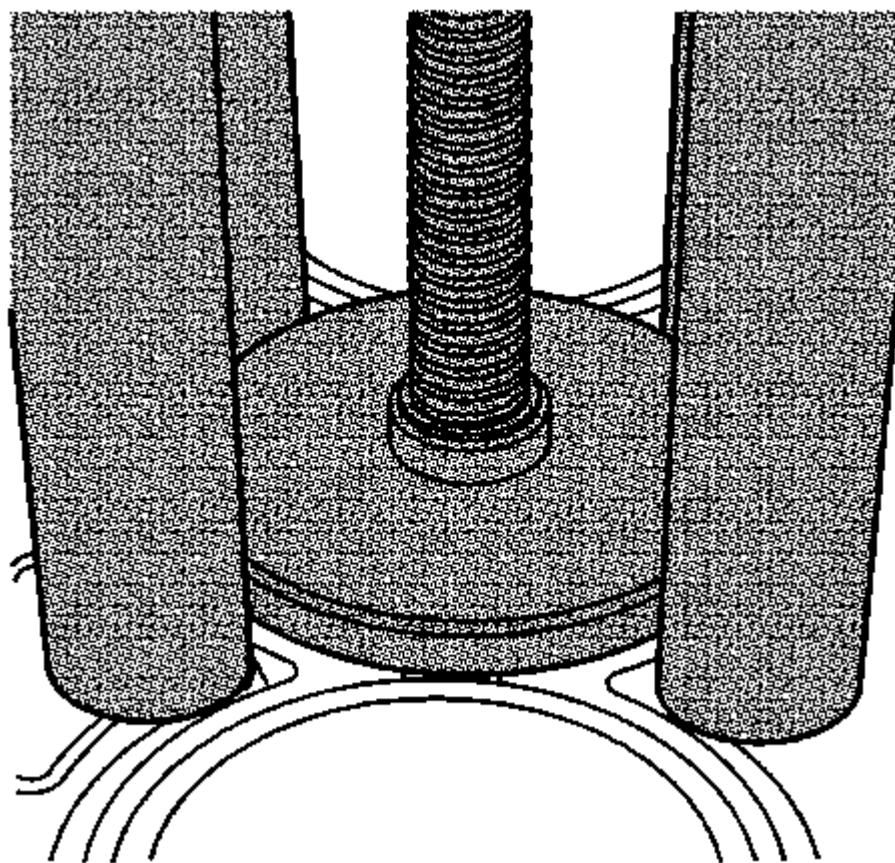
Seating Cylinder Bore Sleeve Completely Using Tool
